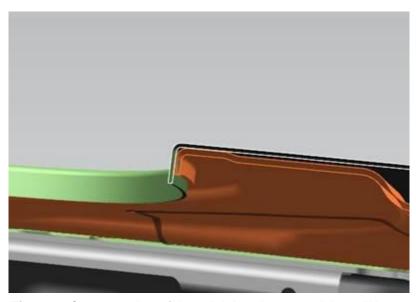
Cut-away view of the adjoining sheet metal that will be separated.
